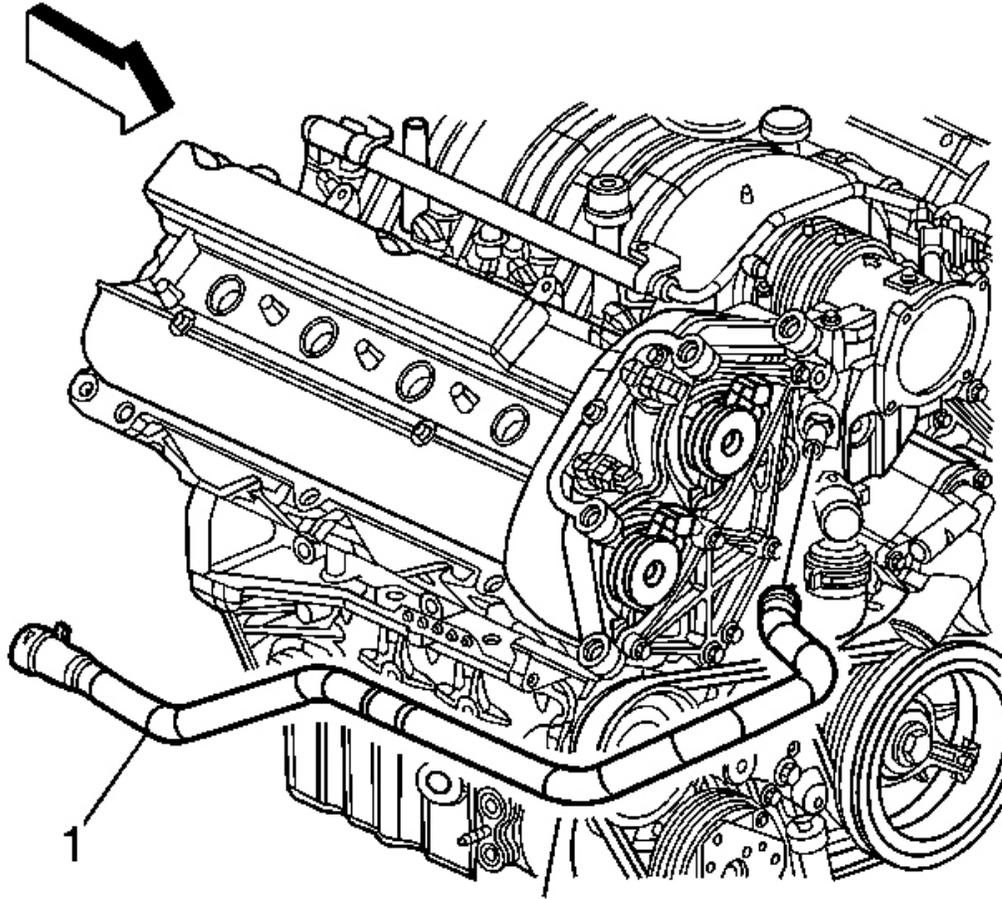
Identifying Heater Inlet Hose At Water Pump
